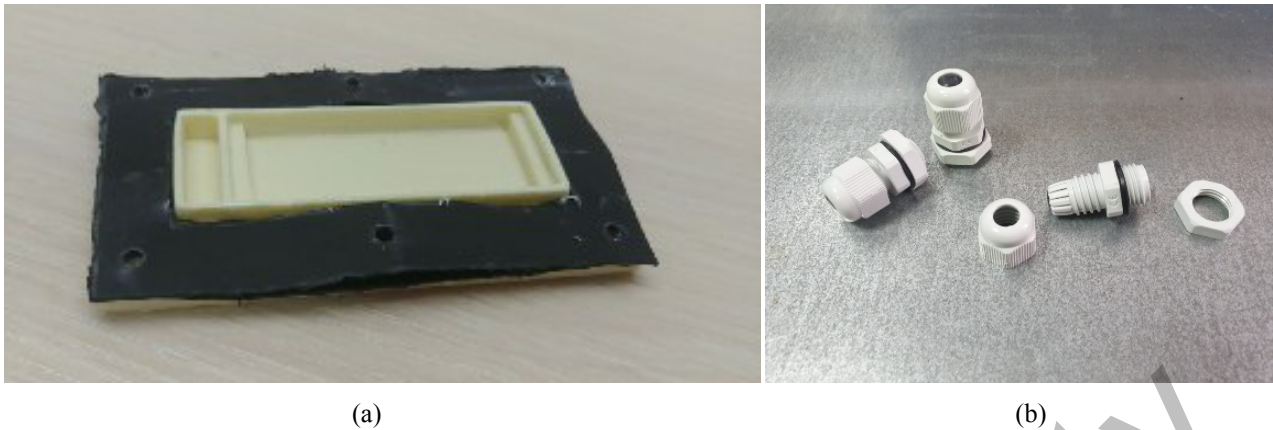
Elements for sealing the enclosure: a) rubber gasket; b) gland for PG7 cable.
